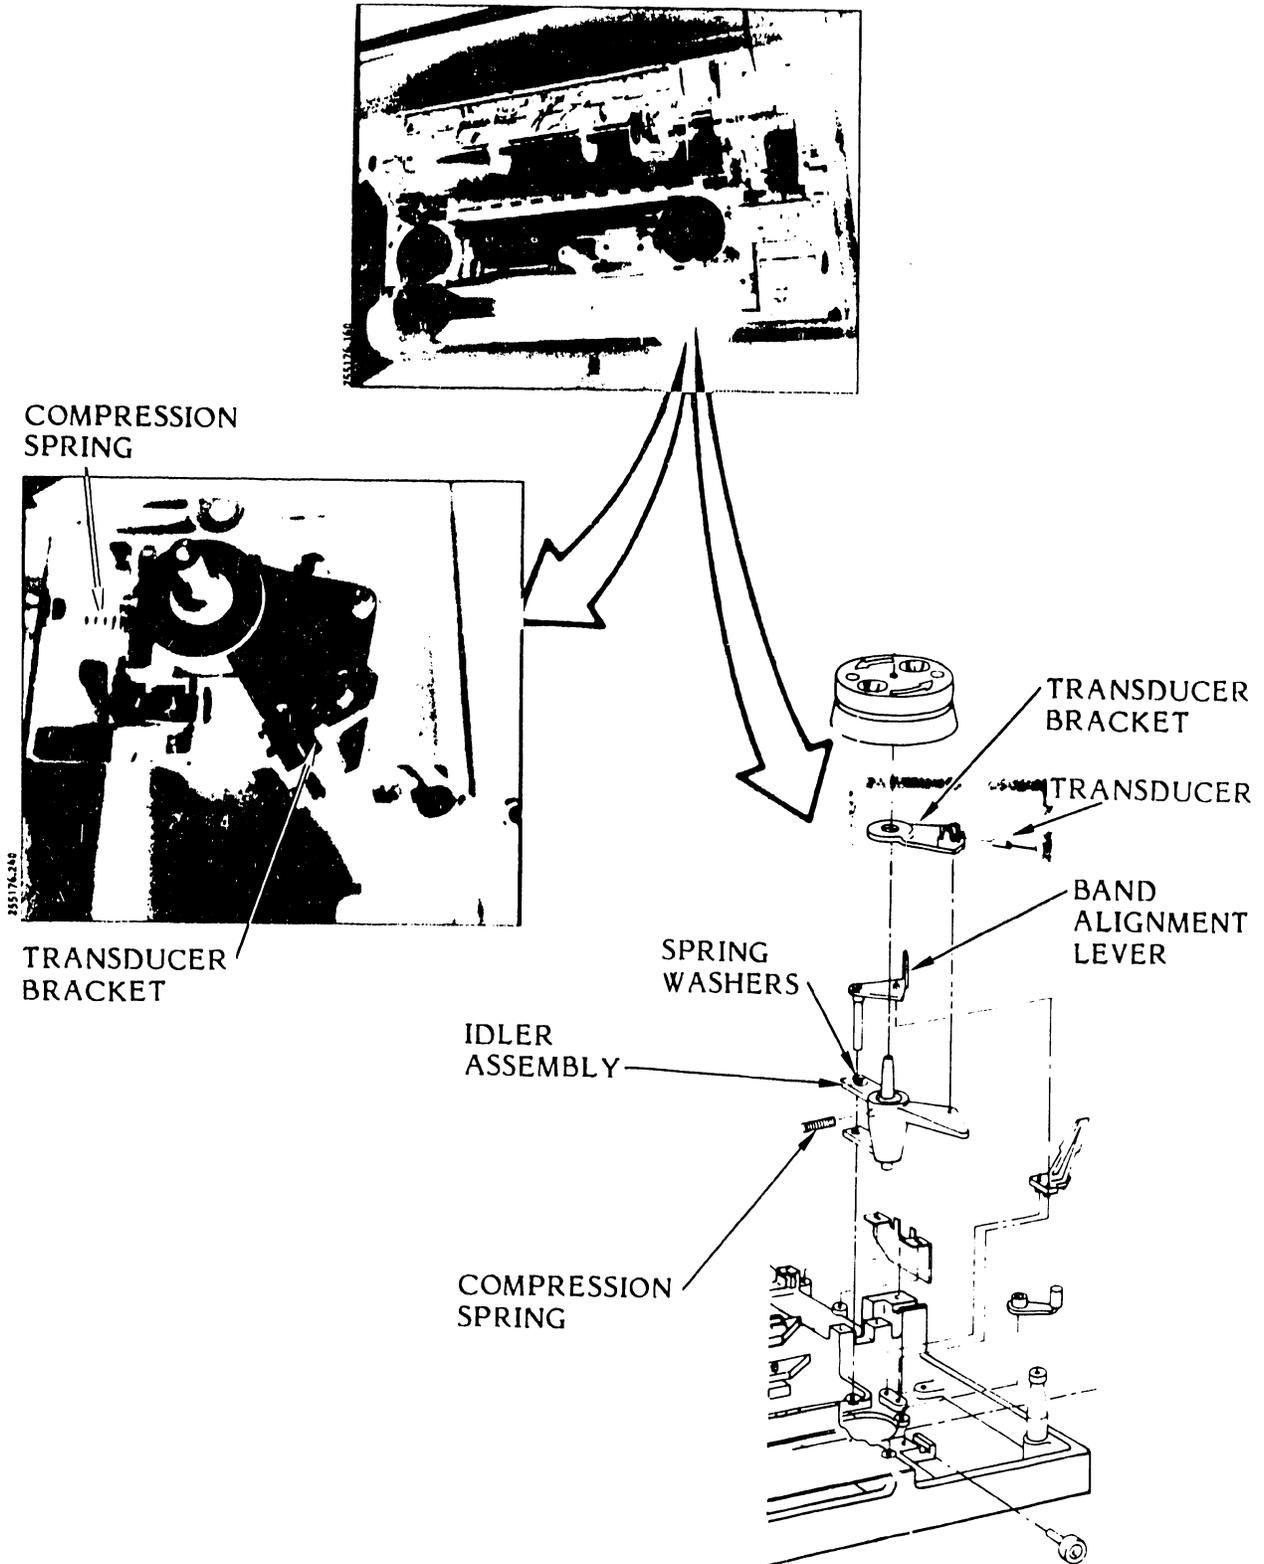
Band Idler Pulley/Shaft Assembly (O-Ring System) Removal/Installation
